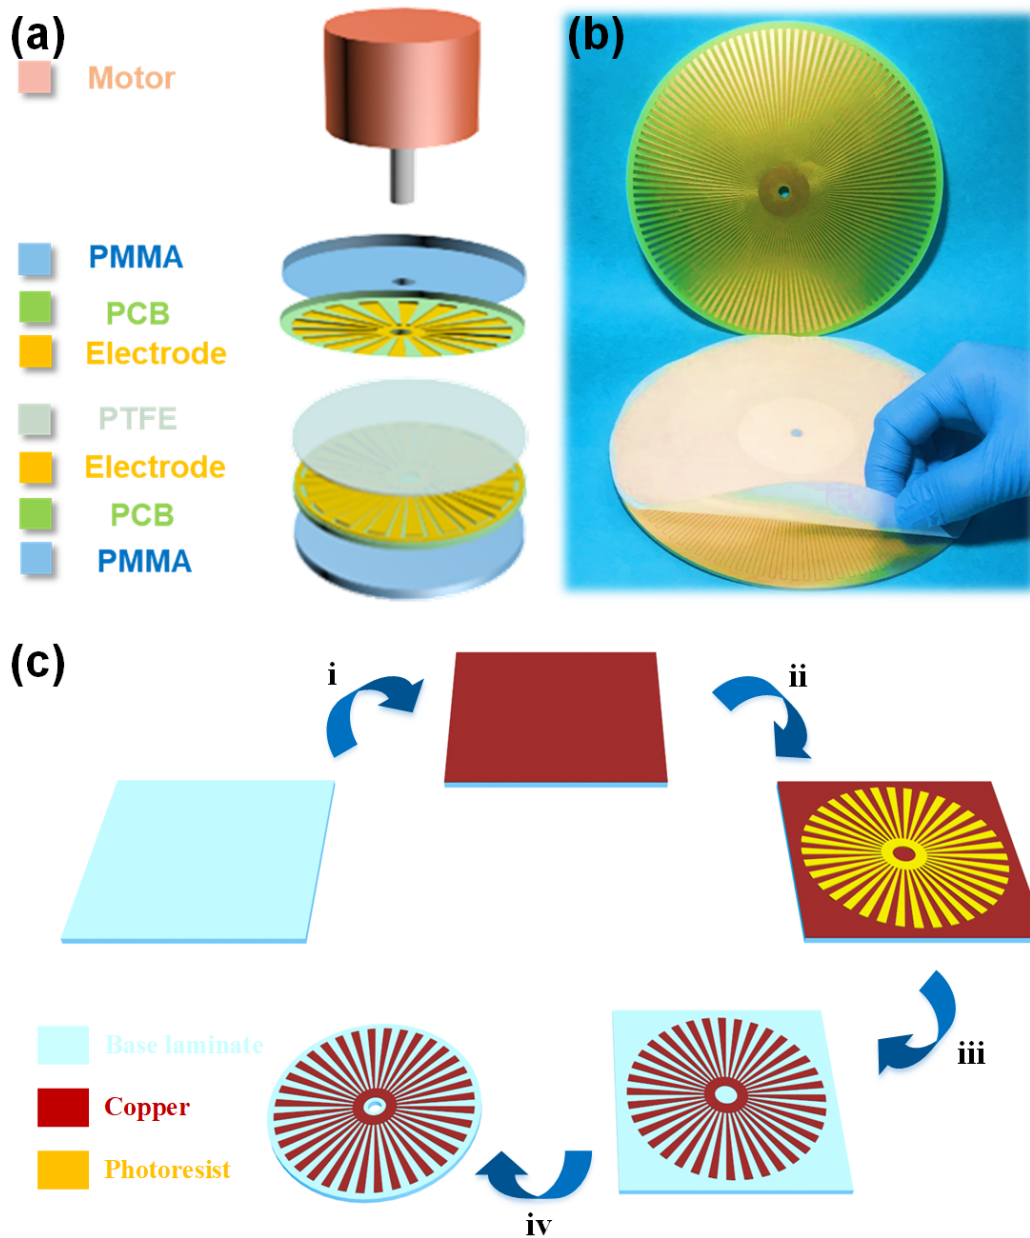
(a) The exploded view and (b) the photograph of a typical RD-TENG. (c) Fabrication process of the RD-TENG.
